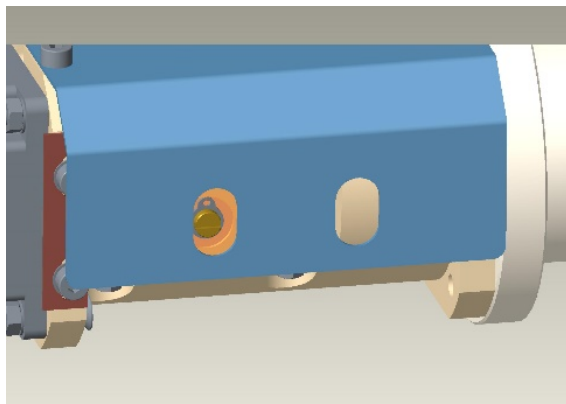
Schematic of the phosphorus cracker driving valve. The following parts (highlighted red) require lubrication after bake-out: 1. Actuator thread and 2. 'Slider' gear.
